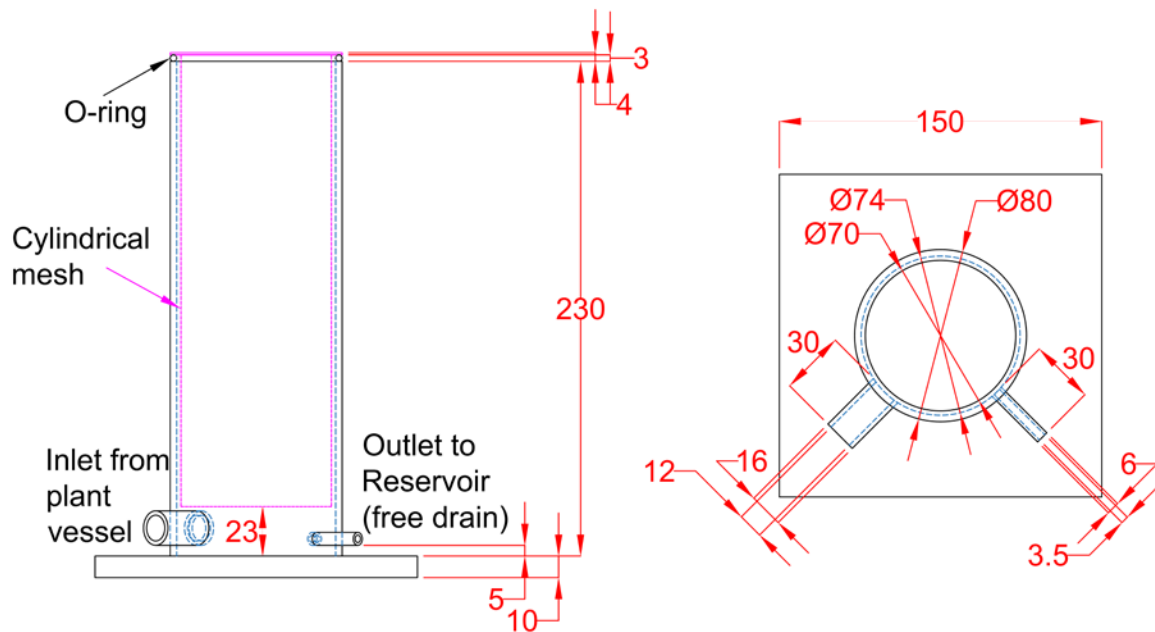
Detailed drawing of the sand filter. Side view on left, top view on right.
